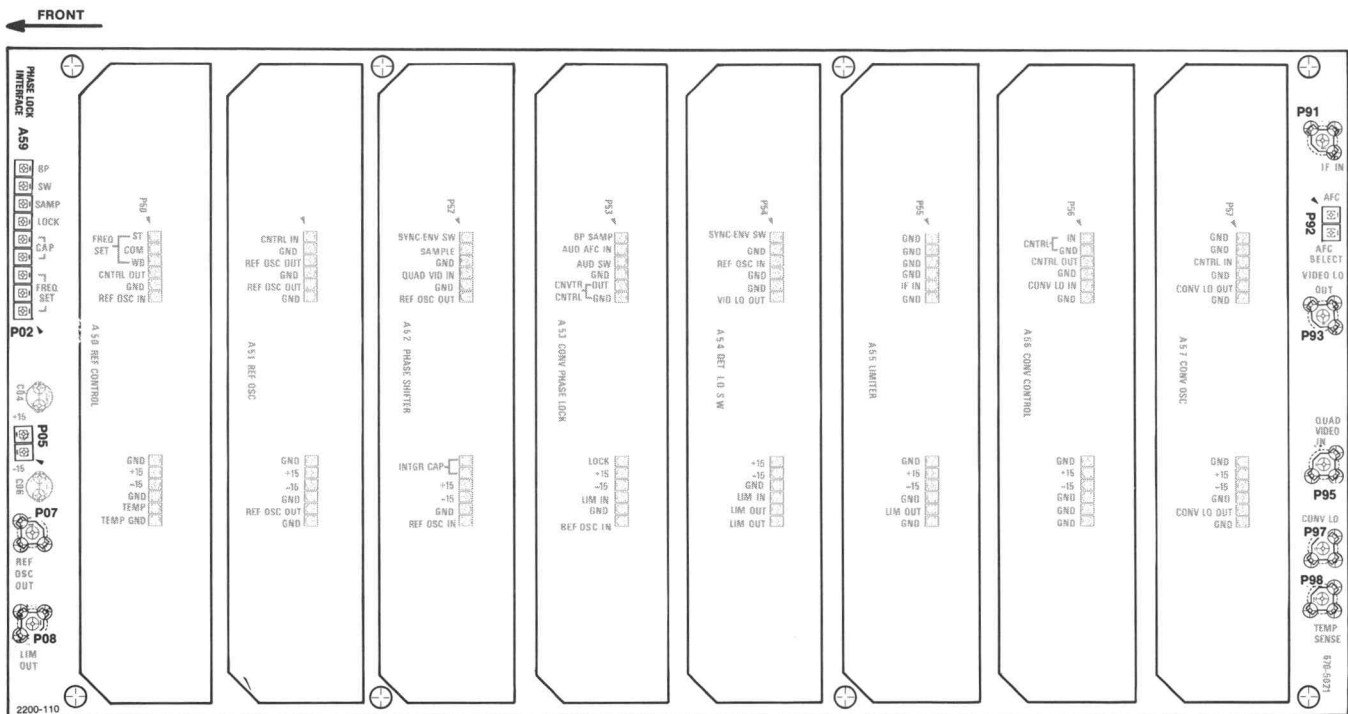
Replacing the Phase Lock Interface Board, A59.
